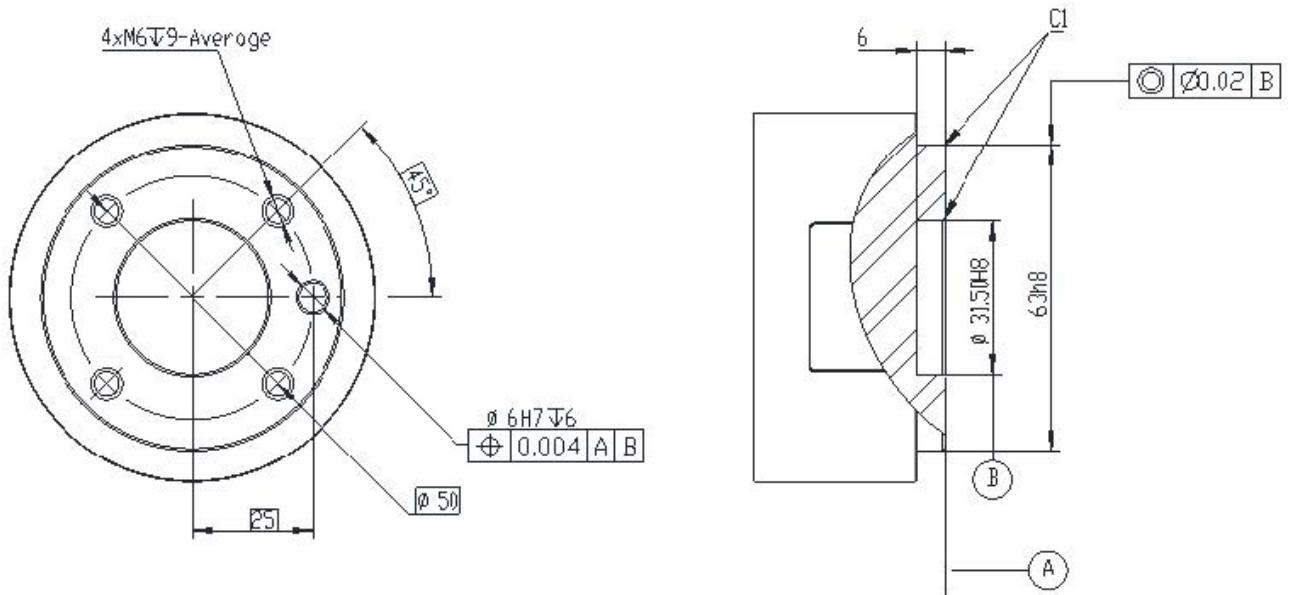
Mechanical dimensions of the tool flange of the robot in millimeters
